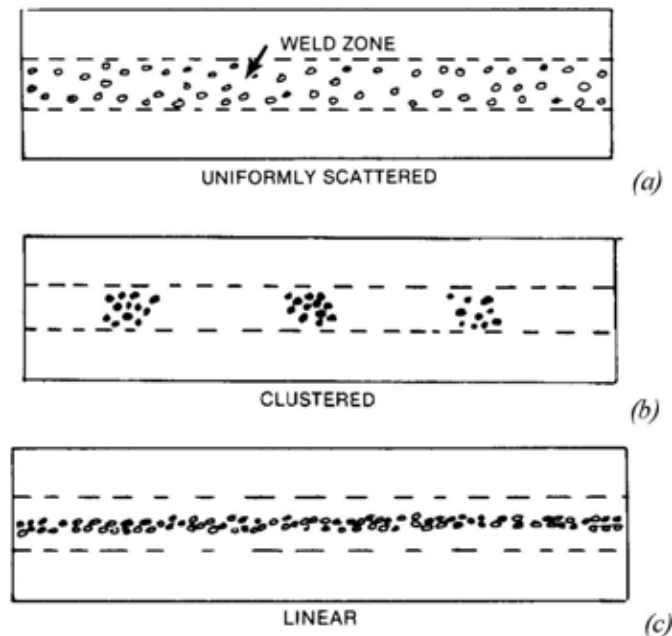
Three types of weld porosity (a) Uniformly scattered porosity, (b) Clustered porosity (c) Linear porosity.
